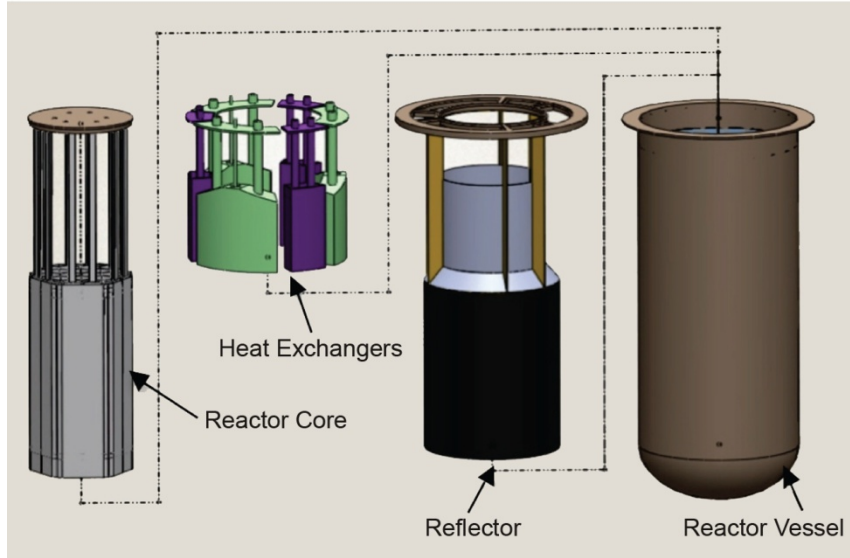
Reactor core bonnet assembly, heat exchanger, top closure flange, and vessel flange.
